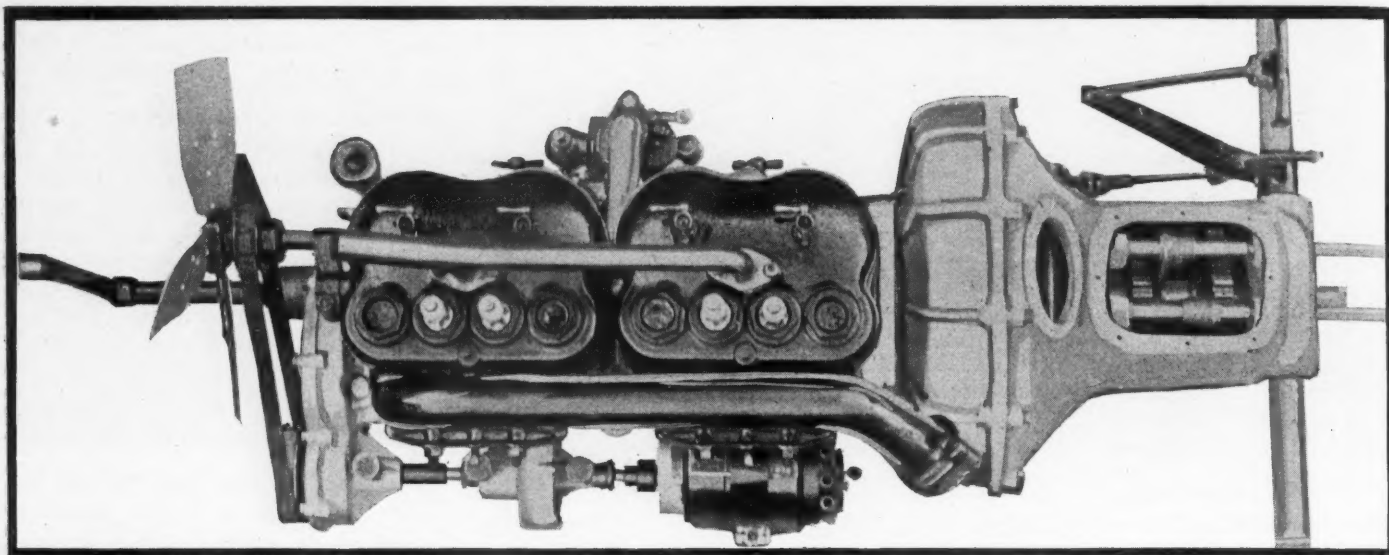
HAZARD UNIT POWER PLANT COMPRISING A FOUR-CYLINDER MOTOR, MULTIPLE-DISK CLUTCH AND SELECTIVE GEARSET, ALL CARRIED ON A THREE-POINT SUPPORT
